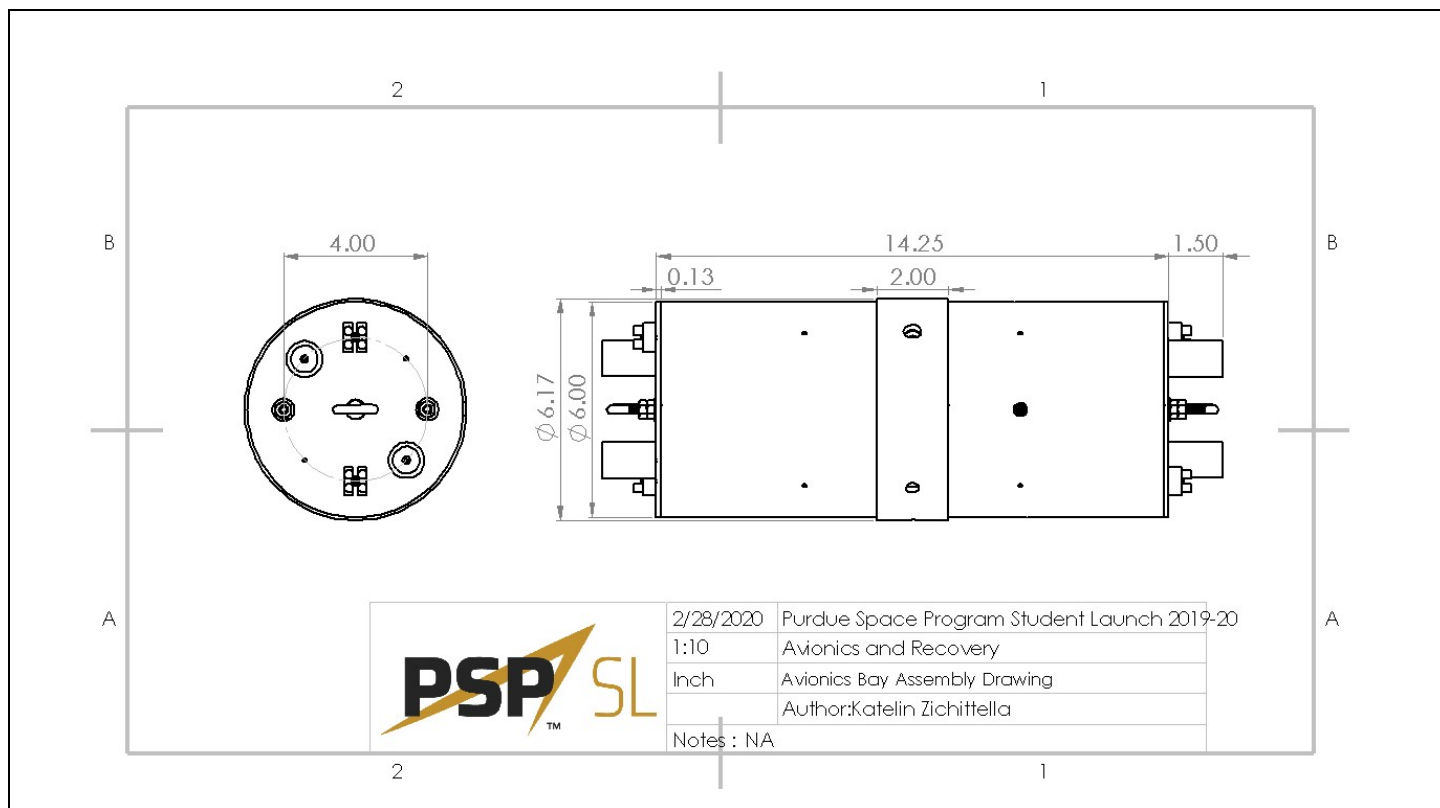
Full-Scale Avionics Bay Dimensional Drawing
